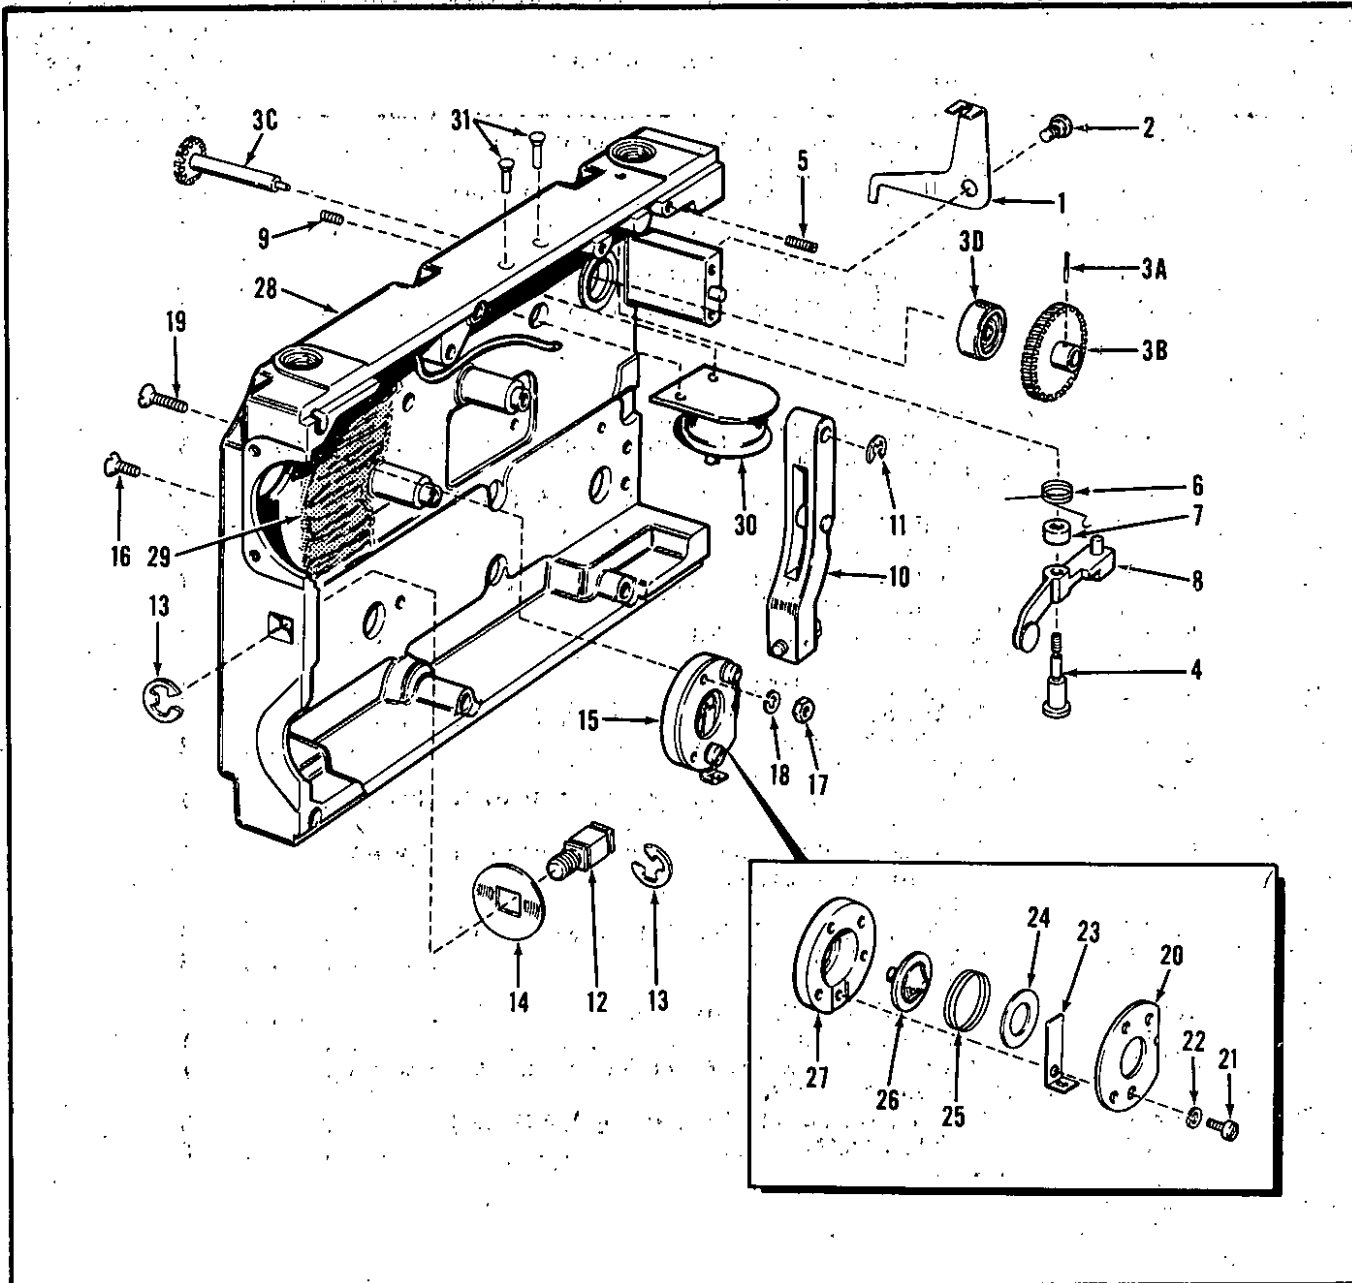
(Sheet 4 of 4) Exploded View of Motion Picture Camera
